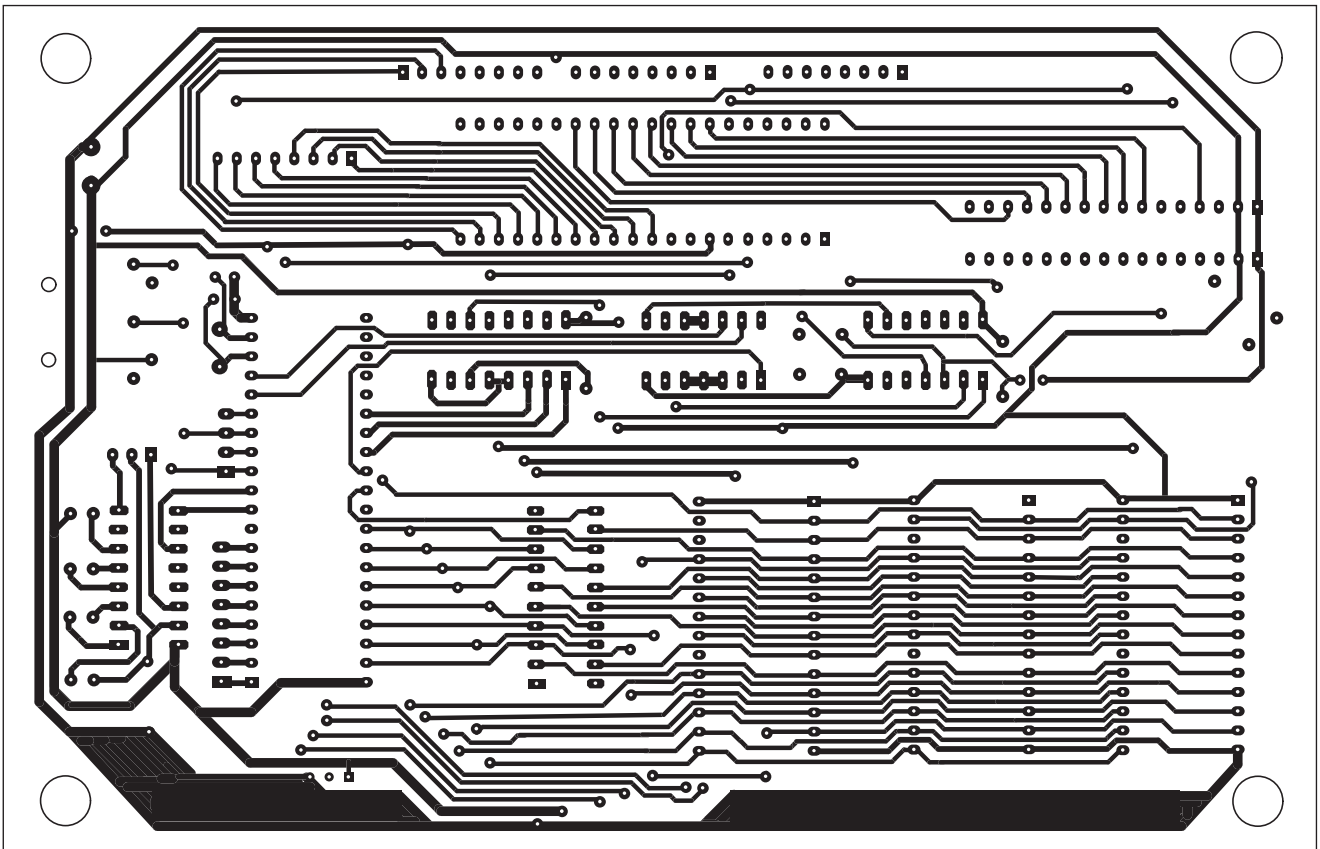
Actual-size, solder-side PCB layout for the 89C51 development board
